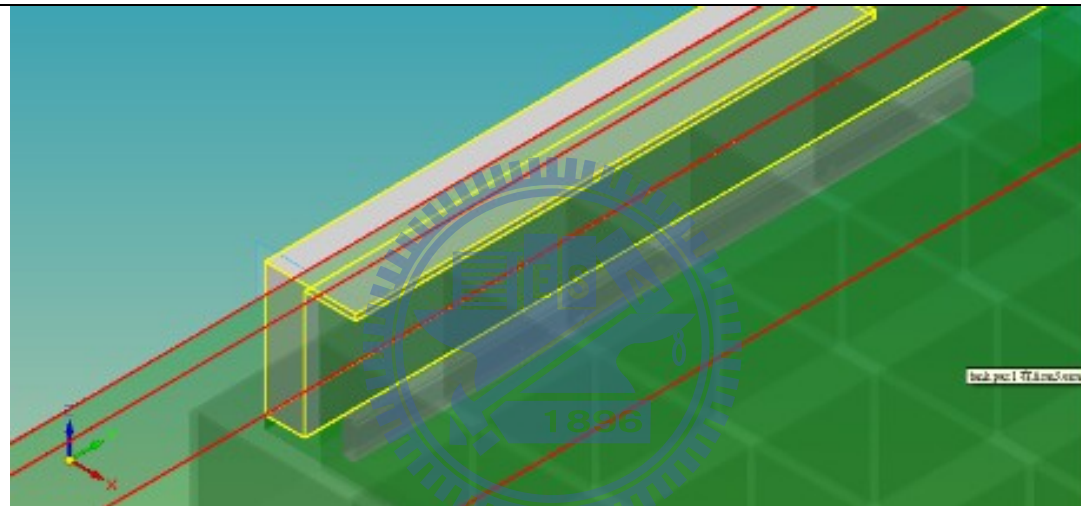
Zoom in of isometric view of the side support of the movable platform
